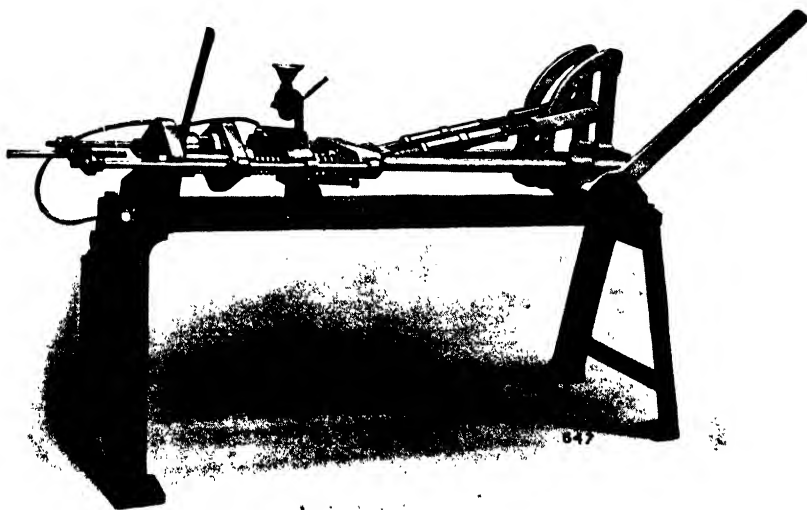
Hand Injection Machine. (Francis Shaw & Co., Ltd.)
